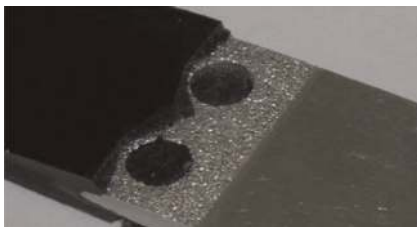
Fracture behavior of 2x5 mm hole geometry with shot-peened surface
